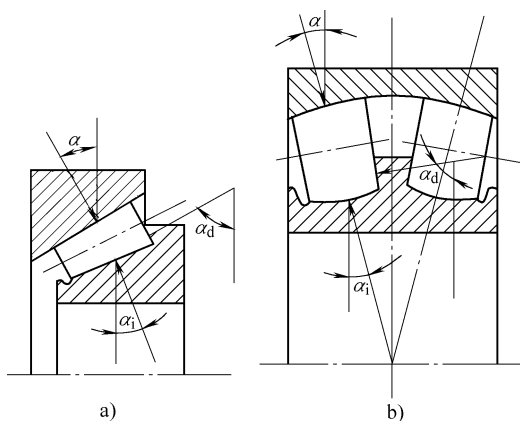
Tapered roller bearing and asymmetrical spherical roller bearing contact angle
